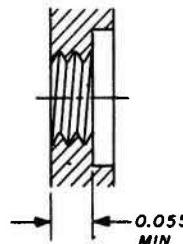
Open type shutter cable socket with straight (American) thread.
